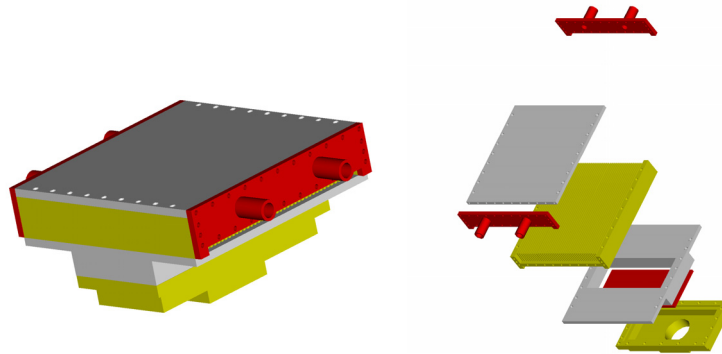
3D drawing of combustor/heat exchanger (Pro/Engineer).
